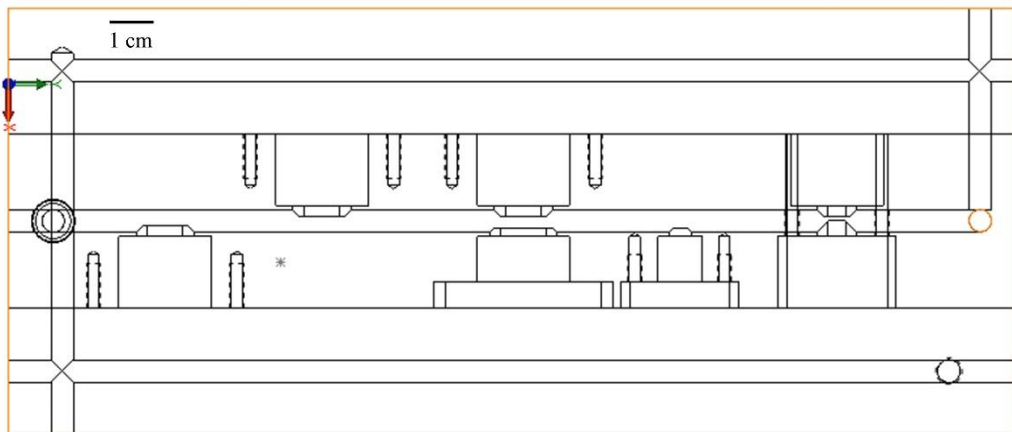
Drawing of the aluminium chamber in Solidworks, showing construction of the gas tubing and the location of the sensor mounting.
